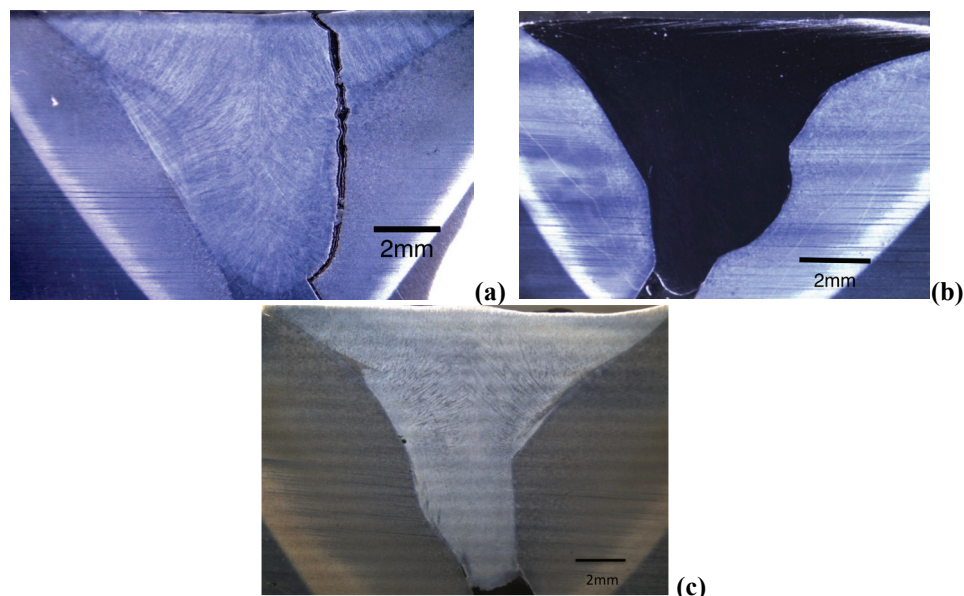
Y-groove test result of (a) SuperArc LA-100 filler wire (b) LTT wire showing cracks in ER100 weld but not in LTPT weld. (c) SuperArc LA-100 filler wire with 150°C preheat
